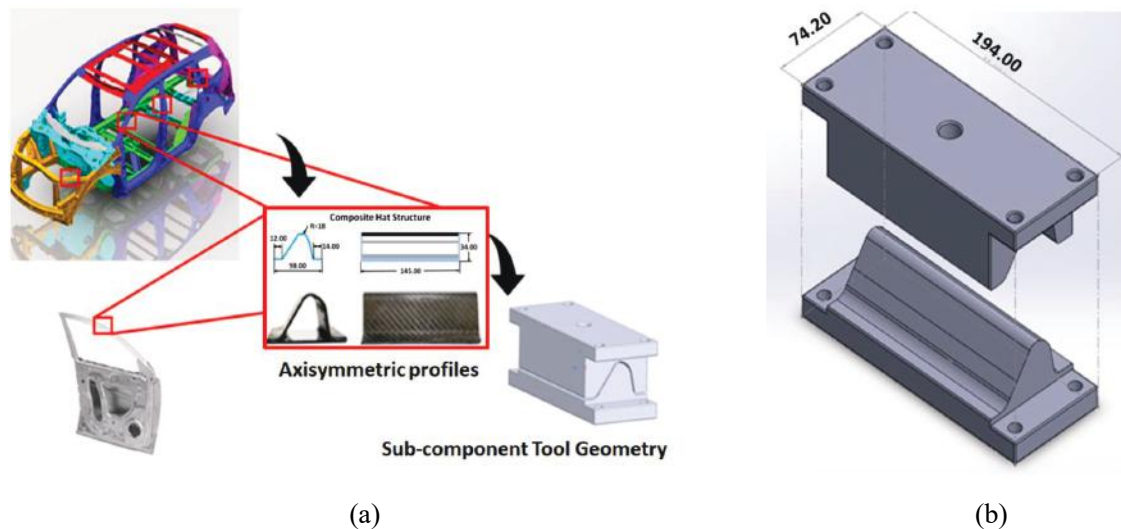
(a) Thermoplastic prepreg forming tool geometry for concept demonstration and (b) sub-component tool parts geometry (dimensions in mm). Source: SRNL.
